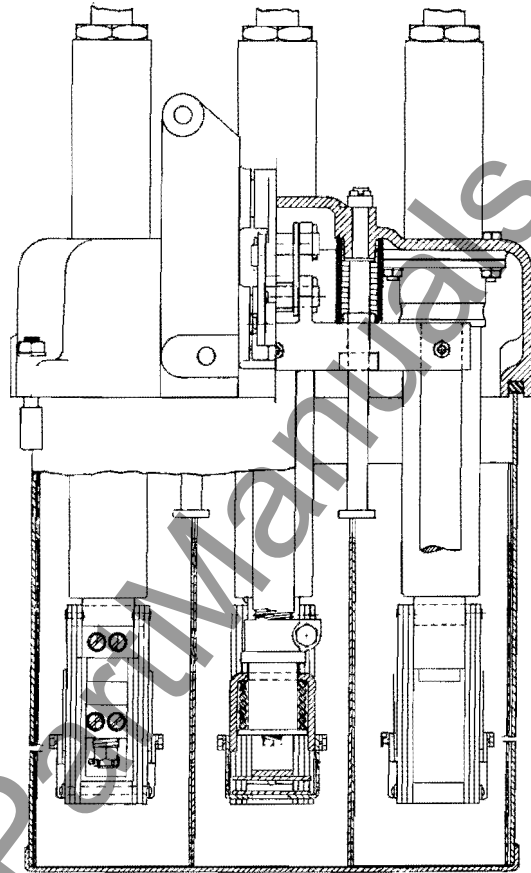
THREE-POLE BREAKER UNIT—FRONT VIEW
